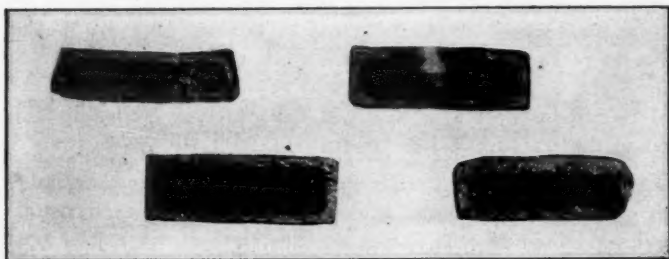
FRACTURE OF BLACK HEART MALLEABLE
